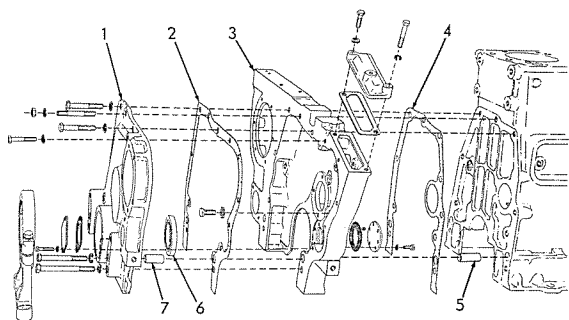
Typical Timing Gear Housing and Cover Details (T-71019)
